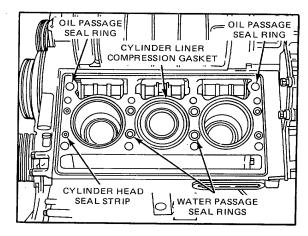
Cylinder Head Gaskets and Seals in Place on Cylinder Block
